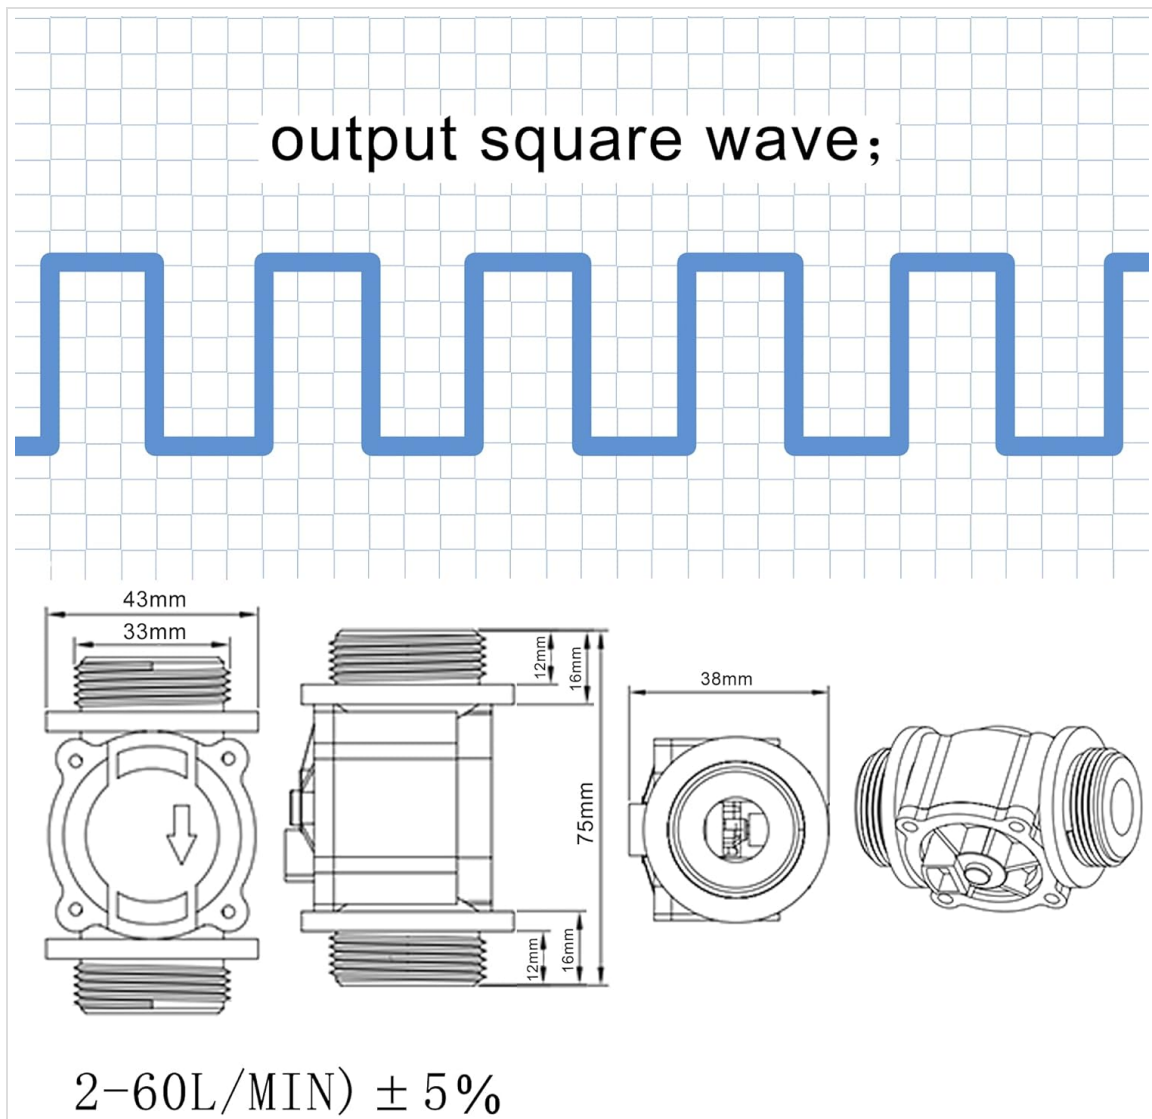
Technical drawing illustrating the dimensions and internal structure of the DIGITEN G1 Water Flow Sensor.
